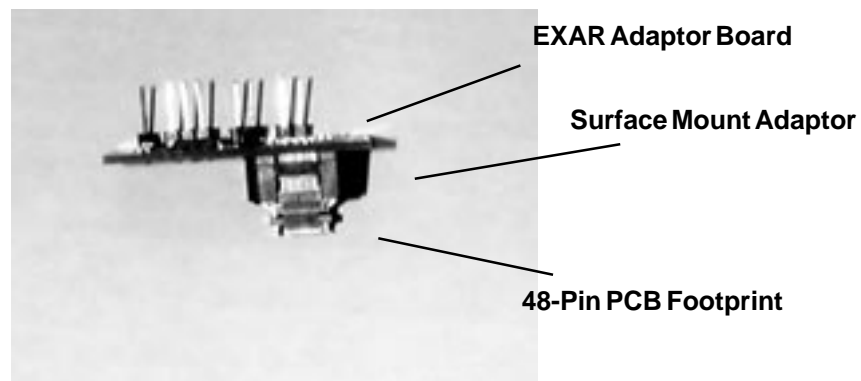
Side View, Surface Mount Adaptor Plugged Into the Exar Adaptor Board
